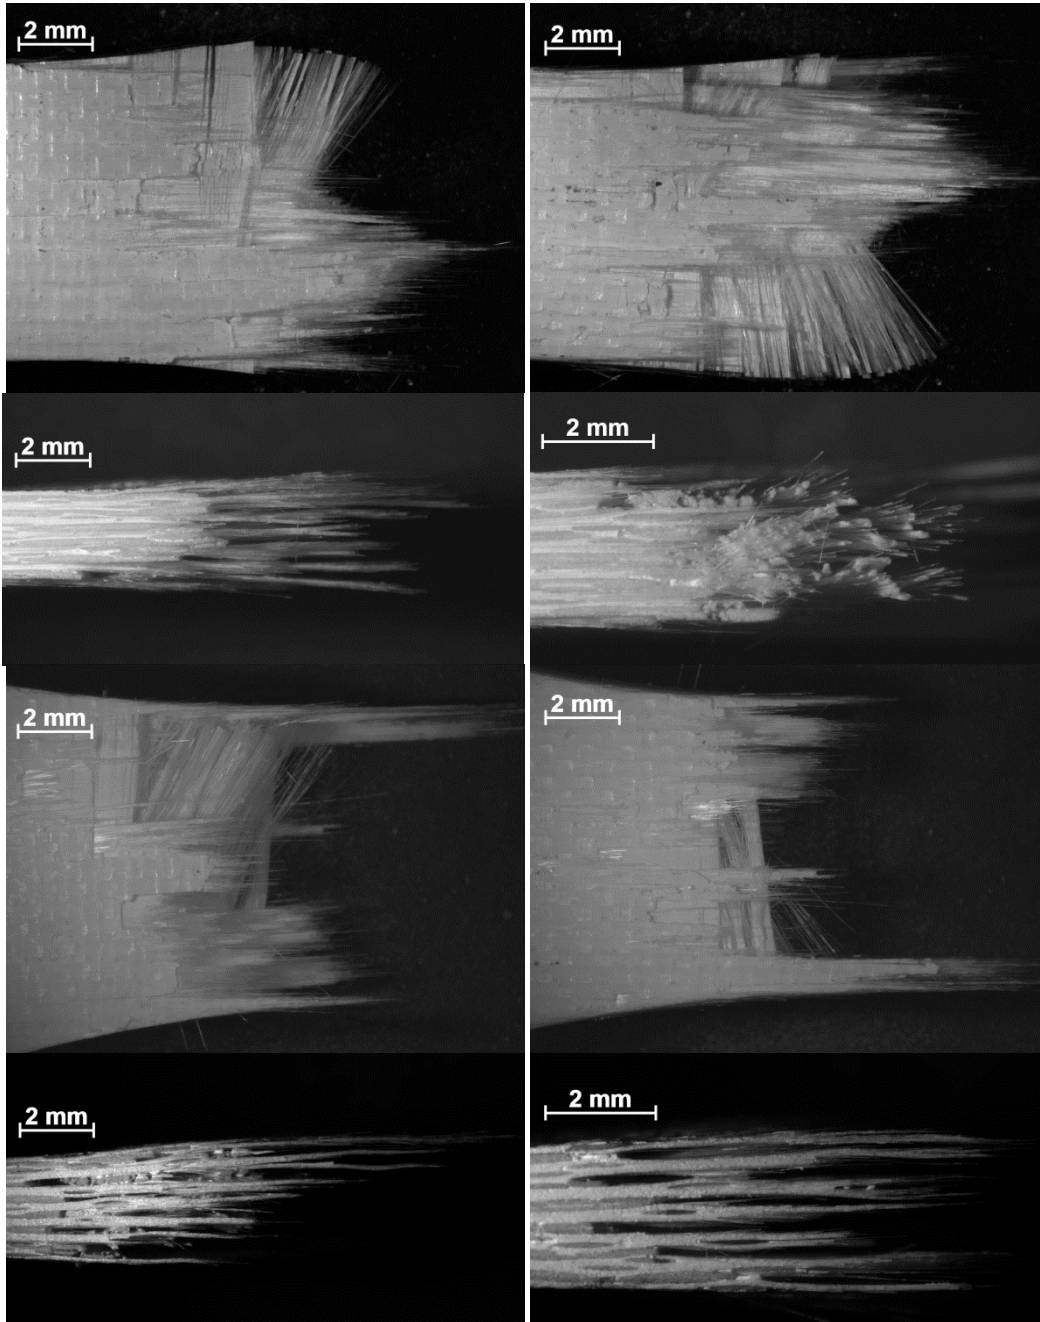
Optical micrographs of fracture surface of as-received N720/AS composite obtained in tensile tests (Specimen 6)
